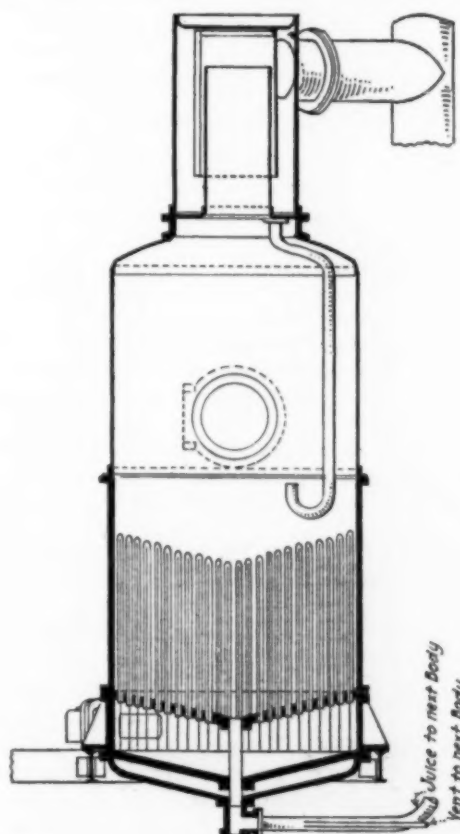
DOUBLE TUBE EVAPORATOR (TYPE G)
